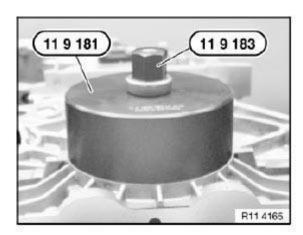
Identifying Special Tool (11 9 181 & 11 9 183) Courtesy of BMW OF NORTH AMERICA, INC.
